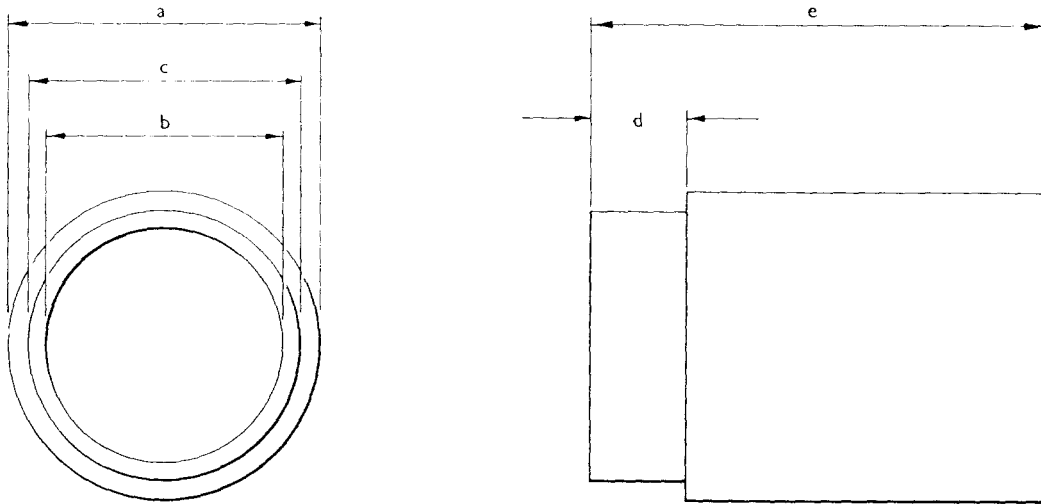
GLAND TUBE SIZES—MILLIMETRES
